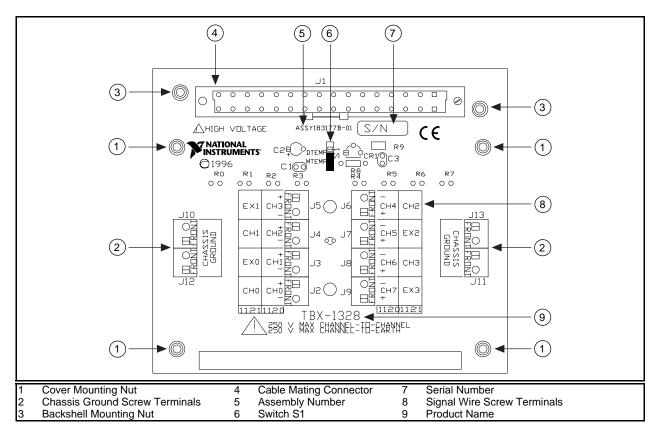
TBX-1328 Terminal Block Parts Locator Diagram
